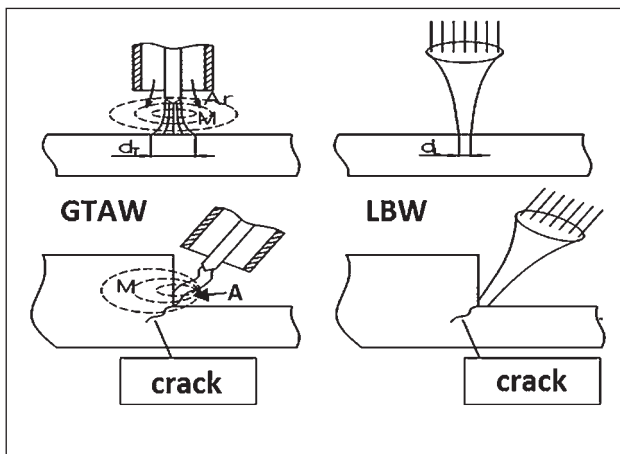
Schematic presentation of LBW and GTAW; d_r , d_l - the diameter of the energy flow, M - the expansion of the electromagnetic field, A - point of concentrated magnetic fields and welding on the surface a) GTAW and b) LBW and welding of corner crack c) GTAW and d) LBW
